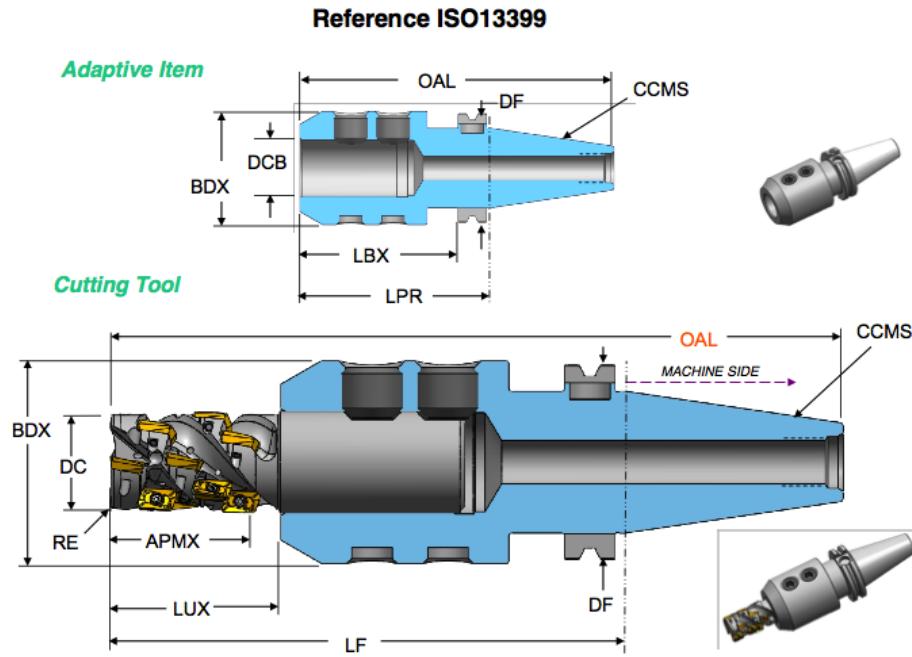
Cutting Tool, Tool Item, and Cutting Item 2
